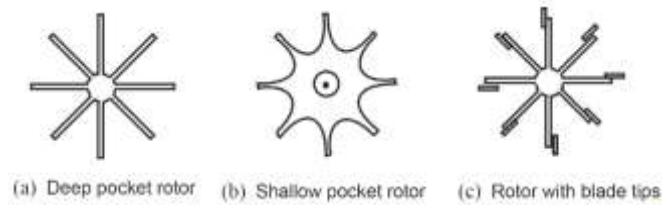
Rotor pocket configurations (Mills, 2016)
